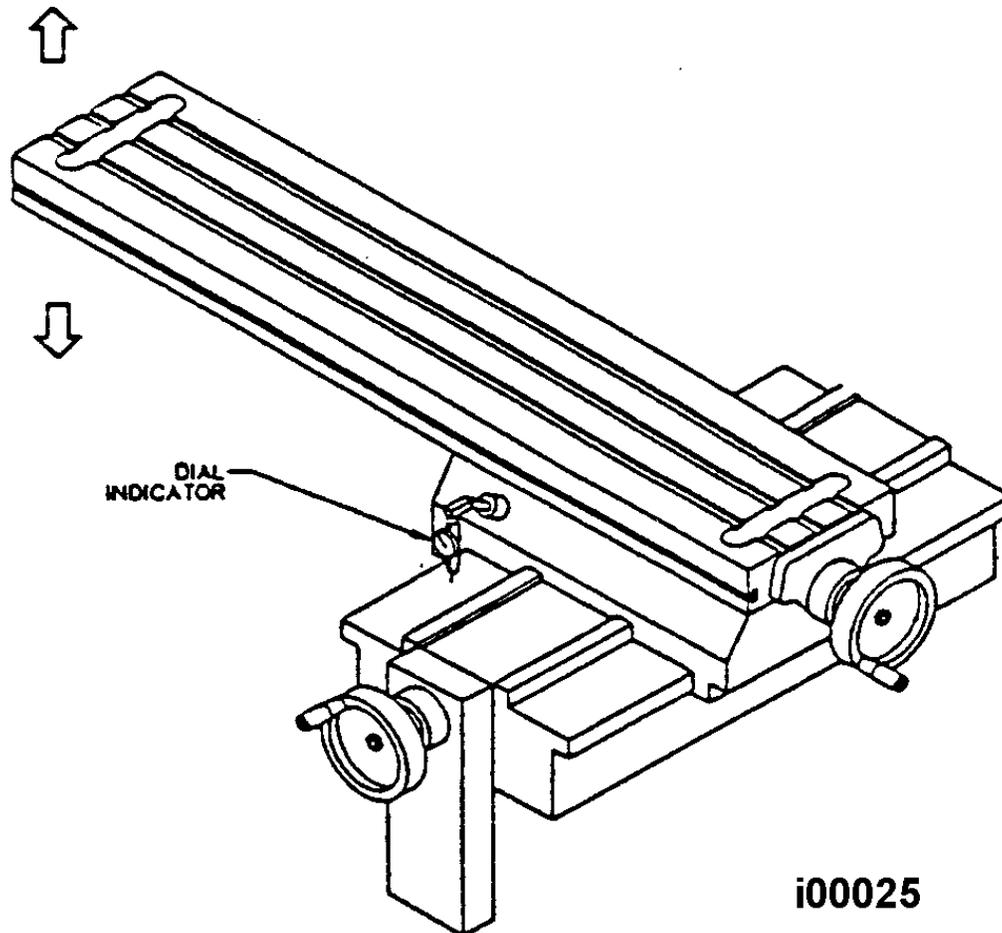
DPMRX2 & DPMRX3 Saddle Bottom Gib Adjustment
